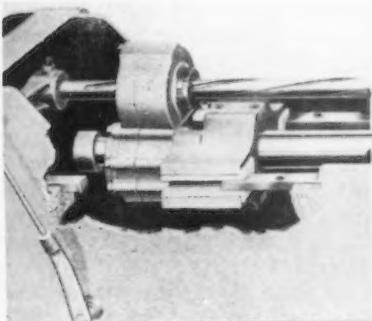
Special spiral drive attachment developed for broaching internal spiral splines.
